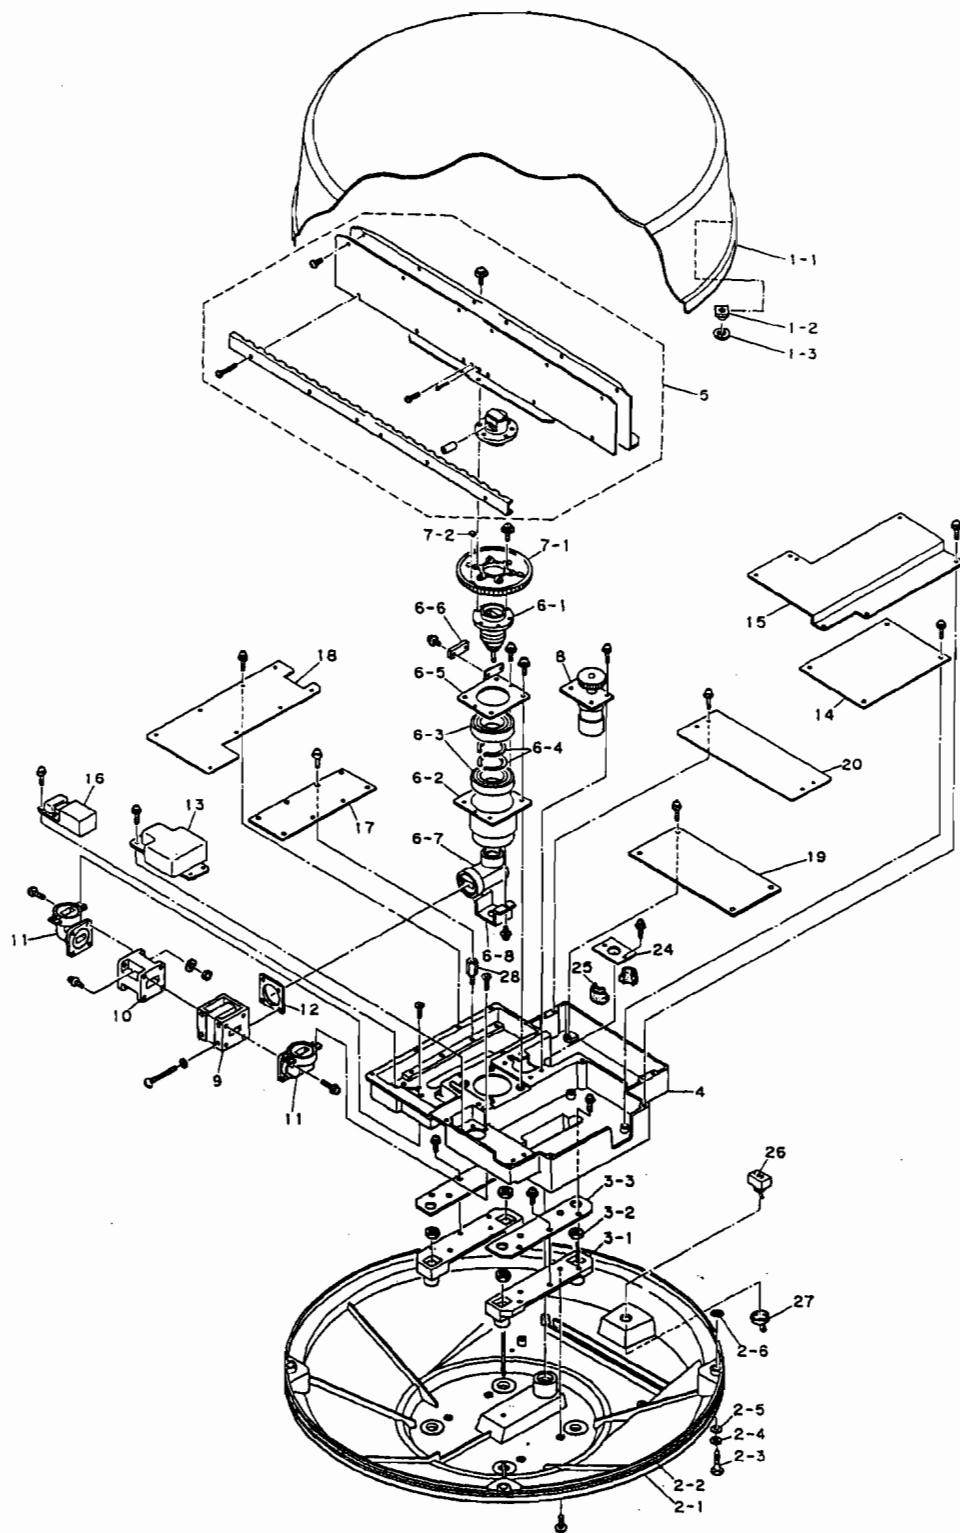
ASSEMBLY DRAWING, R20XX RADOME SCANNER UNIT (M92539)
